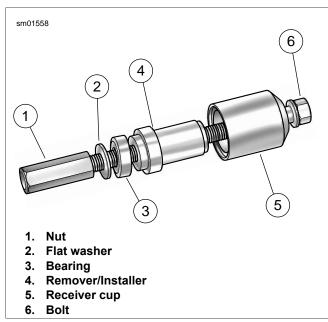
Connecting Rod Bushing Remover/Installer (Part No. HD-95970-32D)
